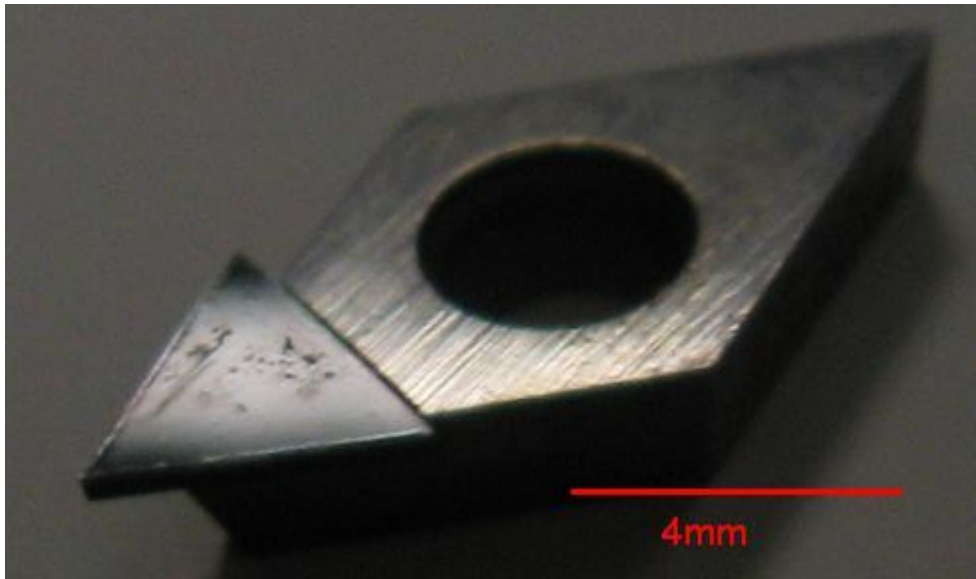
Laser cut CVD tool blank mounted on shank
